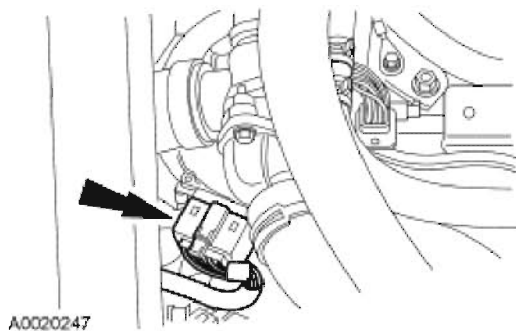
Removing Nut Holding Wiring Harness Bracket
